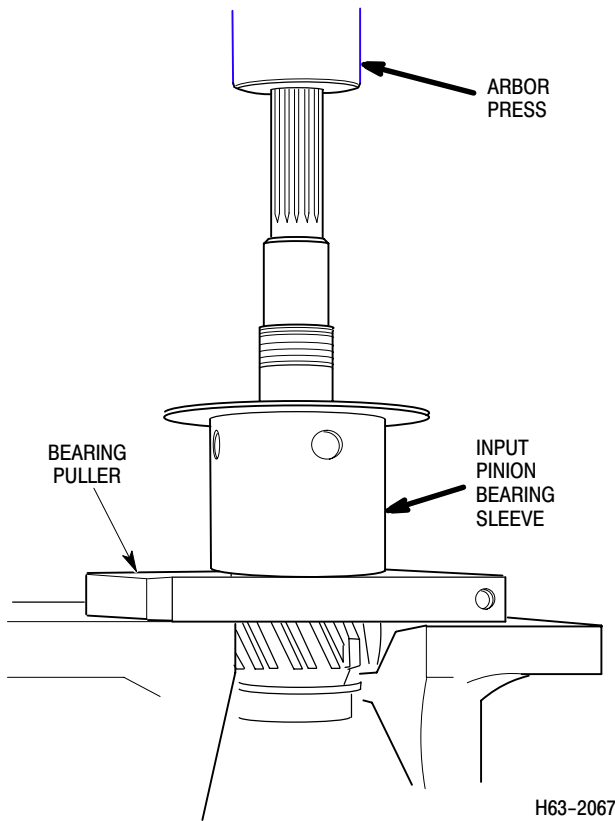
Removal - Input Bearings and Retainer from Input Pinion
